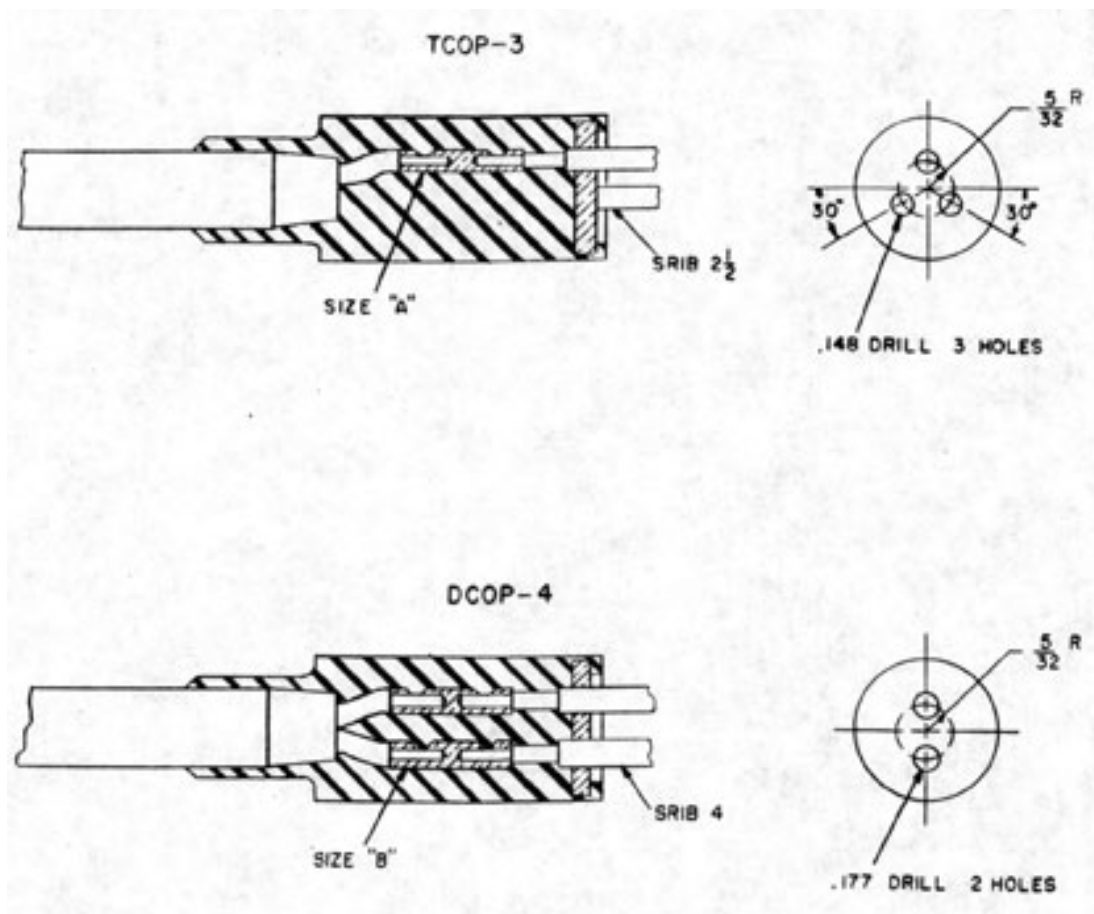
ARRANGEMENTS FOR SEALING CABLE ENDS IN MOLDED PACKING SIZE A
